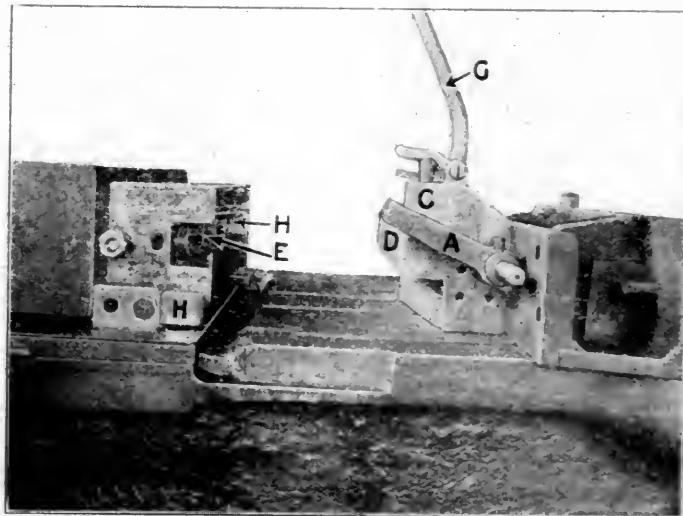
Dies in Place on the Bulldozer, Showing Stripper D Locked in Compressed Position
